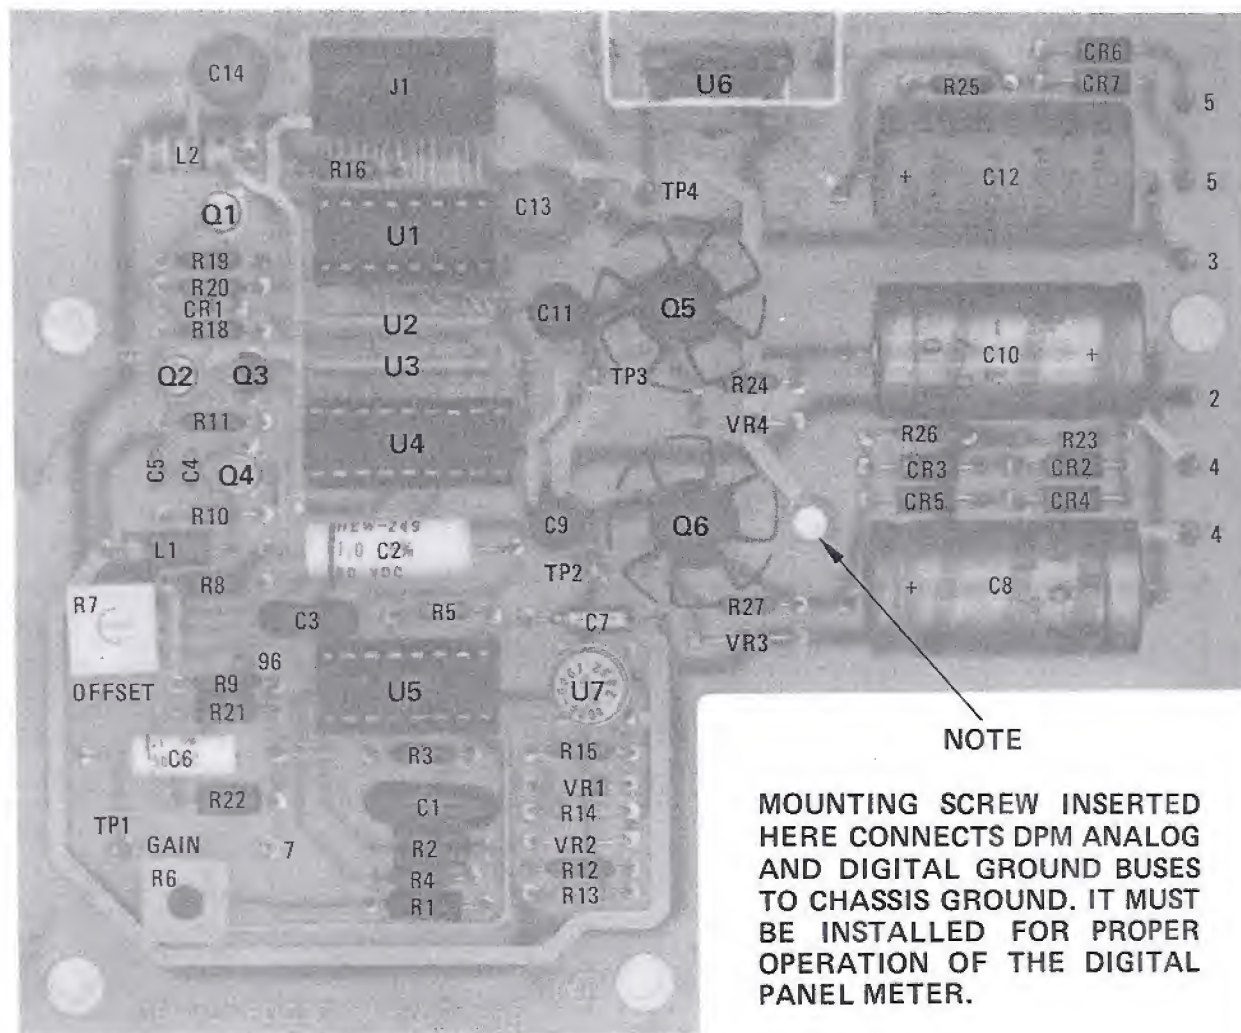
A7A2 DPM Driver Board Assembly Parts Locations
